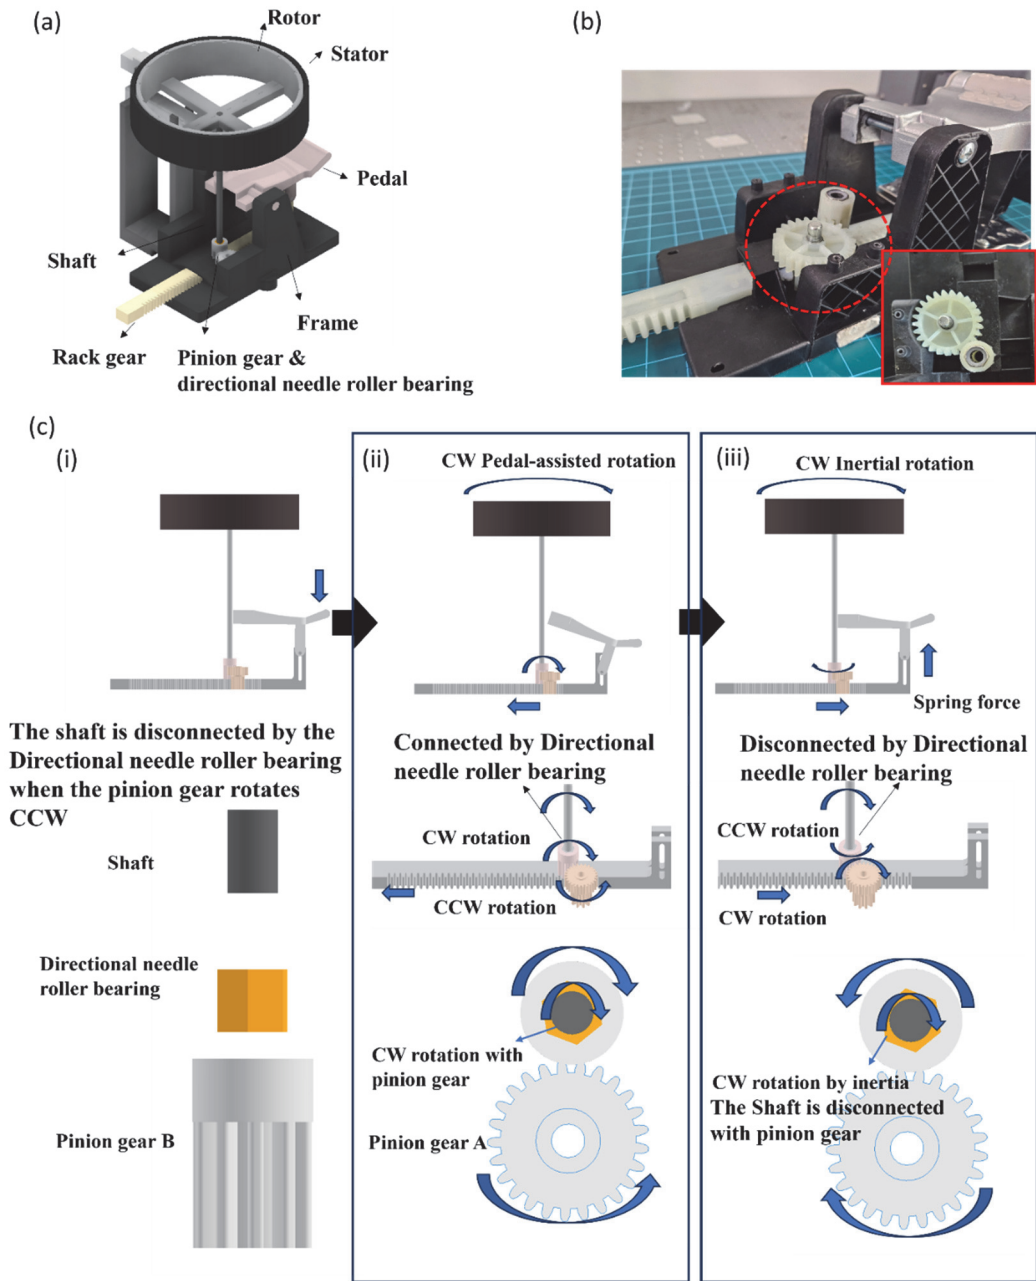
Design of one directional rotation system with pedal control for high-speed rotation: (a) assembled schematic of P-TENG, (b) photograph of two pinion gears, and (c) principle of one-directional shaft rotating.
